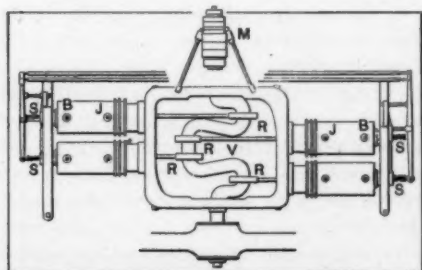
The Oerlikon four-cylinder, three-crank motor
